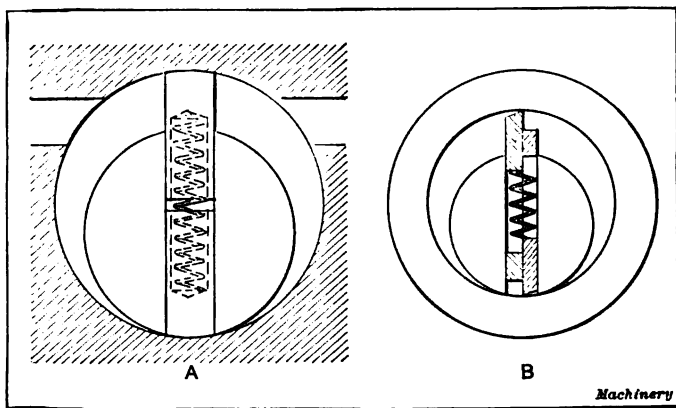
Two Types of Wing Pumps for Cutting Lubricant
